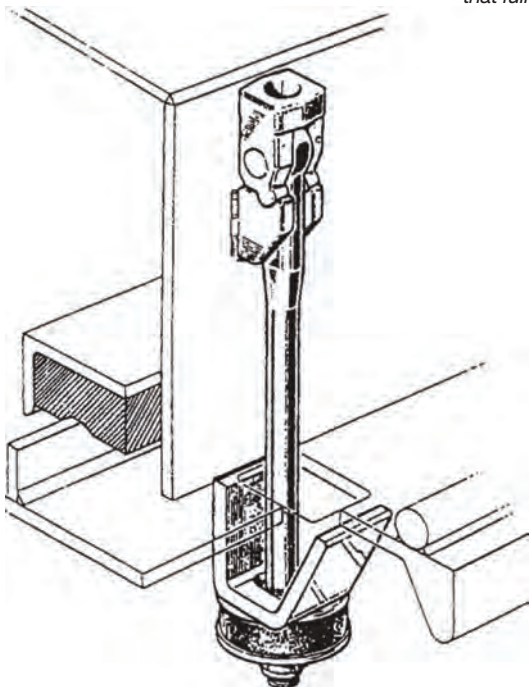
Cut-away drawing of the side of a hatch cover secured to the cantilevered hatch coaming by a quick-release cleat with a rubber washer and adjusting nut. The steel-to-steel contact between the hatch and the coaming means that increasing the tightness of the cleat will not improve the hatch's weathertight integrity
